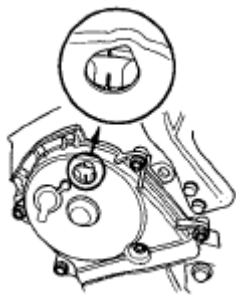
Identifying Camshaft Pulley Marks - Rear
